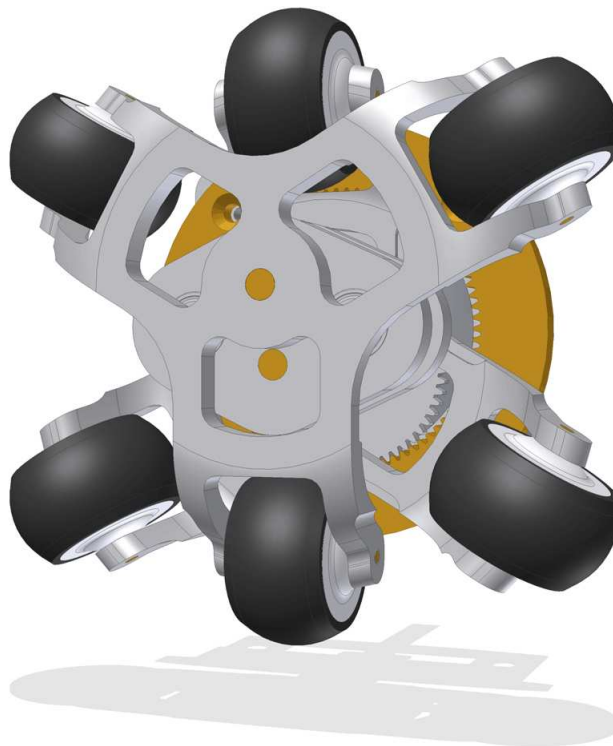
CAD model of the complete Reuleaux omnidirectional wheel assembly
